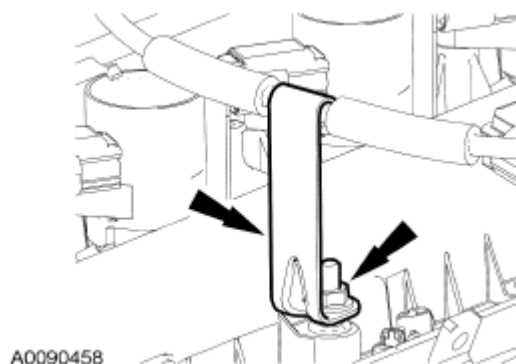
Locating Accelerator Control Cable Bracket Nut (1 Of 2)
